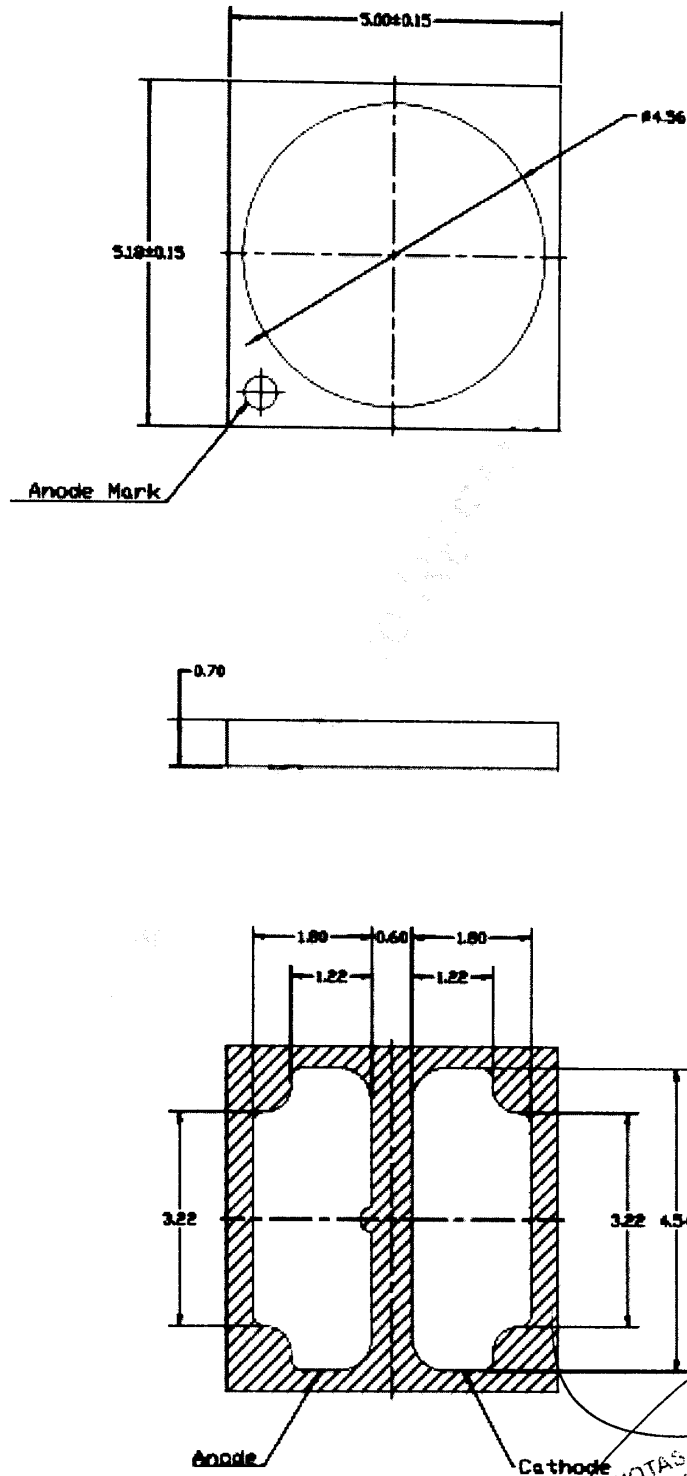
Mechanical drawings for the LUXEON 5050 (all dimensions in millimeters).
